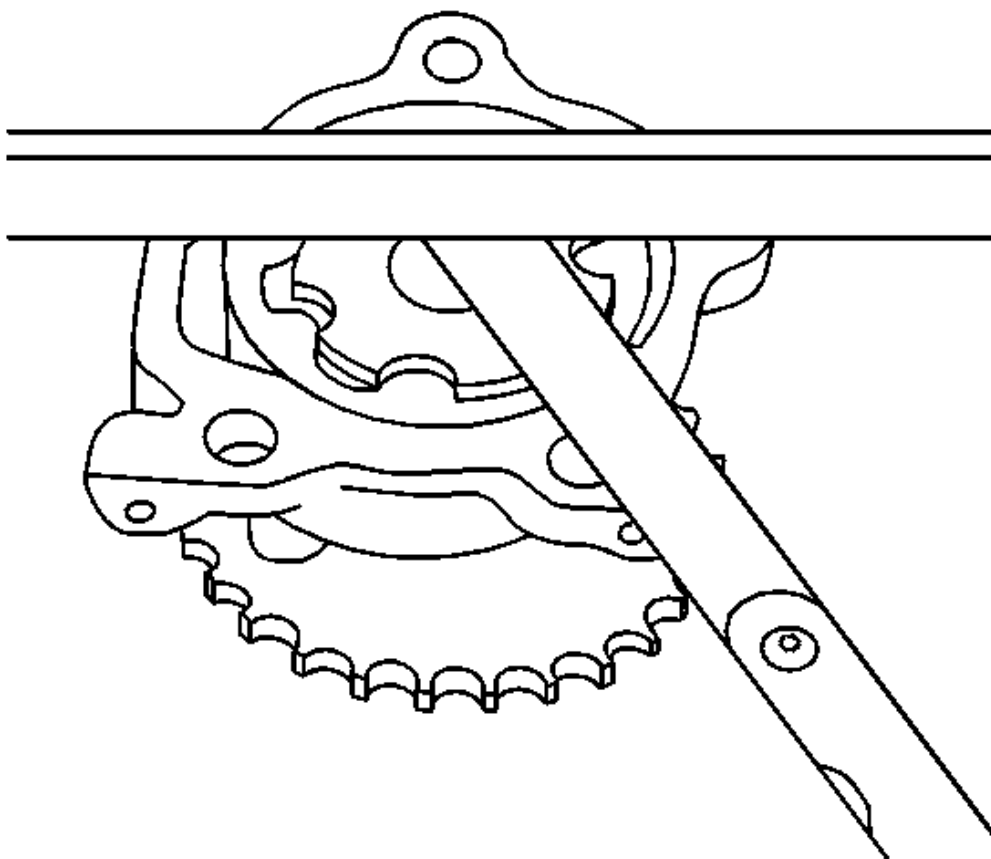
Measuring Side Clearance Between Oil Pump Gears & Straightedge
